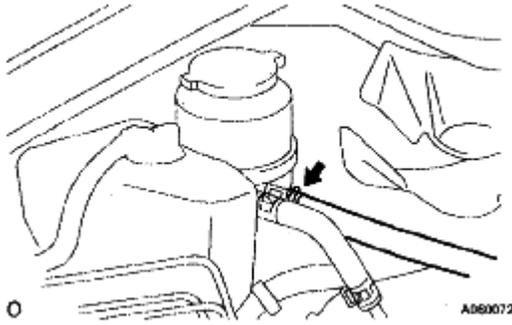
Locating Oil Reservoir To Pump Hose No. 1
